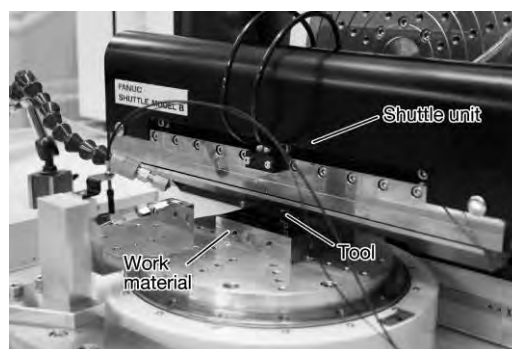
Experimental setup for micro-lens array fabrication using ultra-precision cutting machine with shuttle unit.
